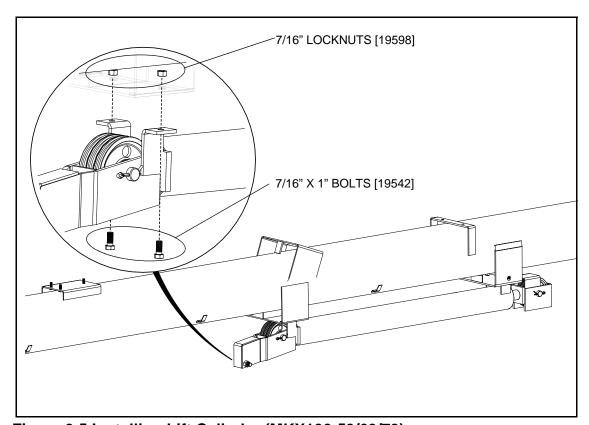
Installing Lift Cylinder (MKX100-53/63/73)
